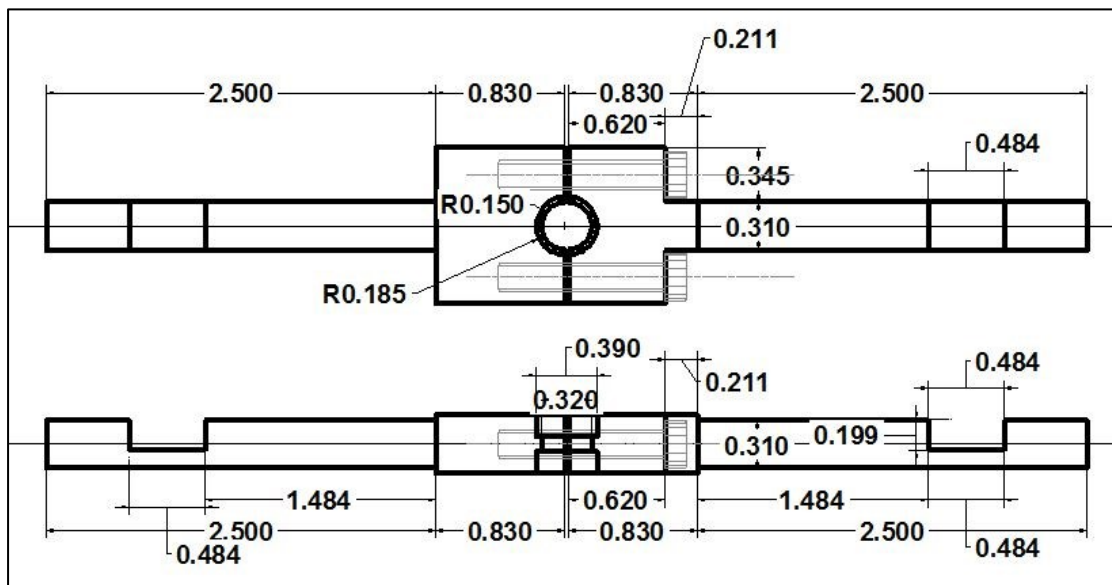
Lower aluminum fixture used to attach the LVDTs to the DB-specimen
